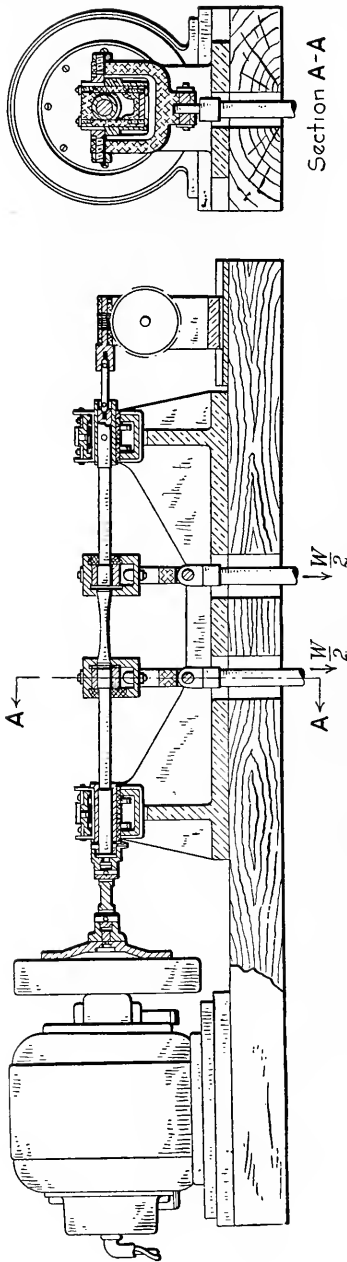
Diagram of rotating beam-type testing machine. (R. R. Moore.)
